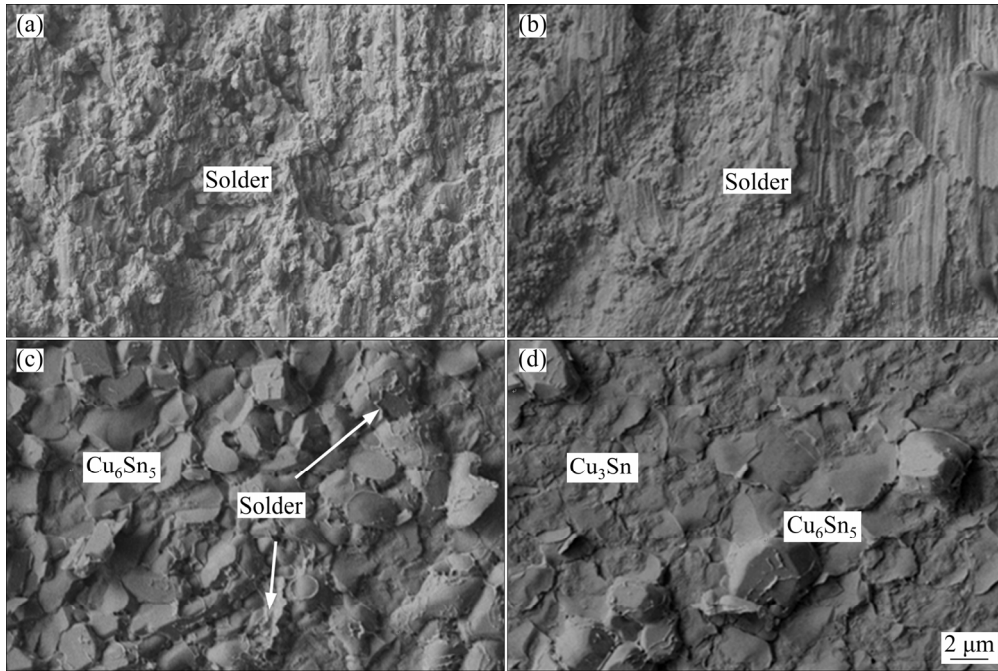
Fracture surface morphology of mixed solder joints with 22.46 wt.% Pb at different temperatures: (a) 298 K; (b) 223 K; (c) 173 K; (d) 123 K
